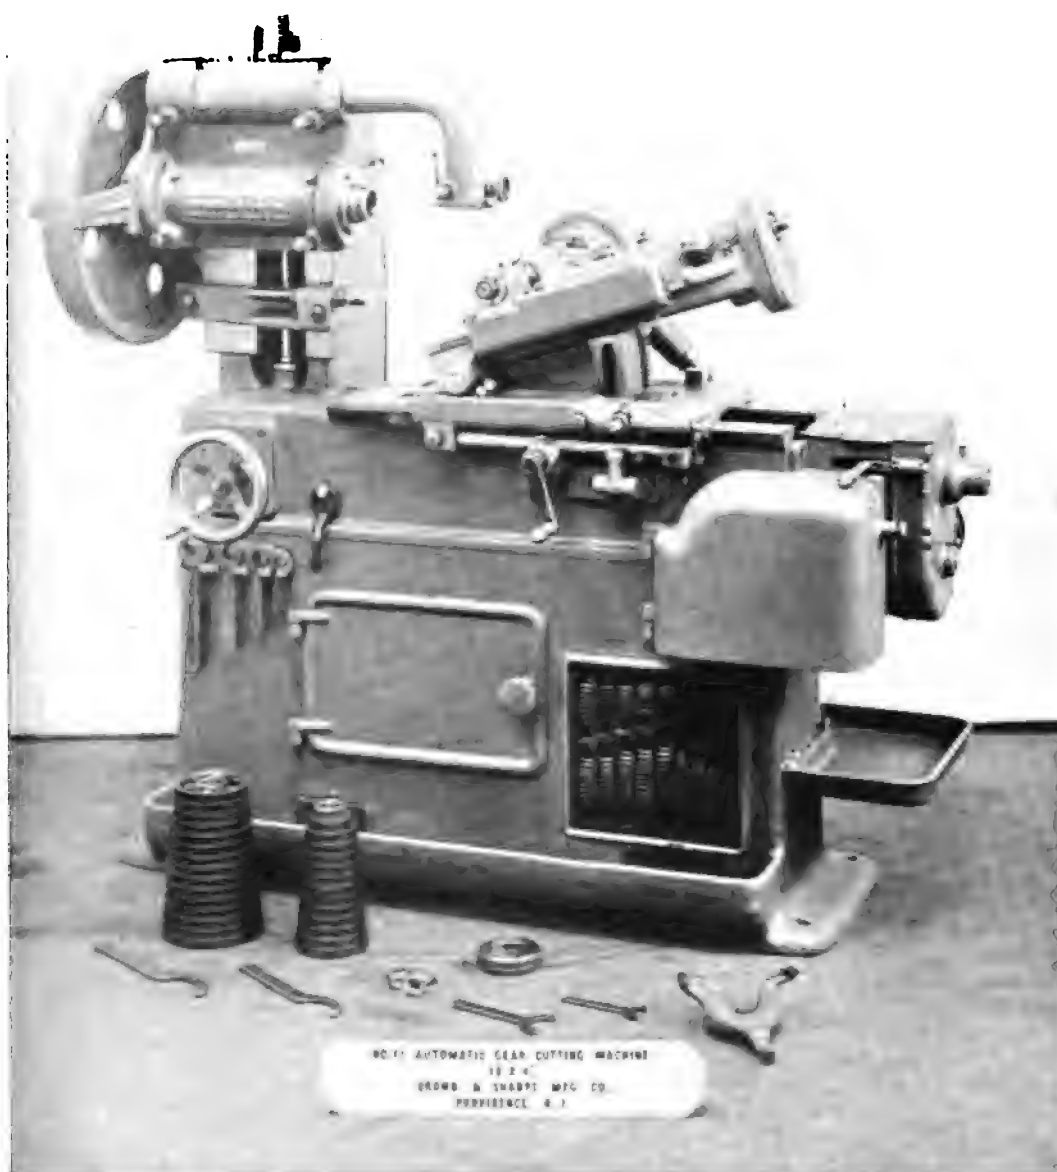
AUTOMATIC GEAR CUTTING MACHINE. (Brown & Sharpe Manufacturing Co.)
